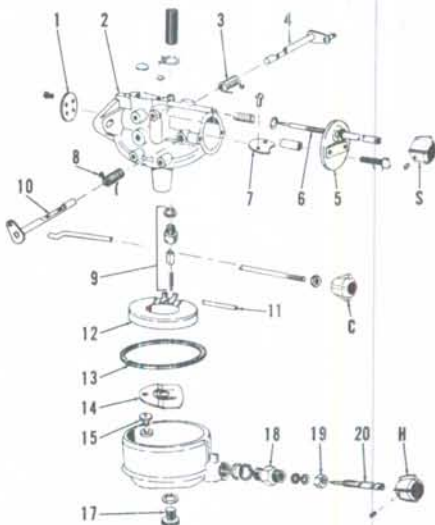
Exploded view of Carter N type carburetor used.
